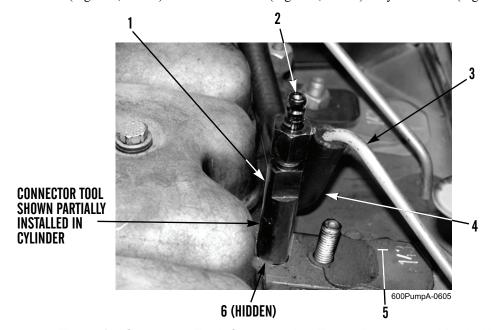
Connector Tool, Compression Tester Adapter, and Drain Hose.
